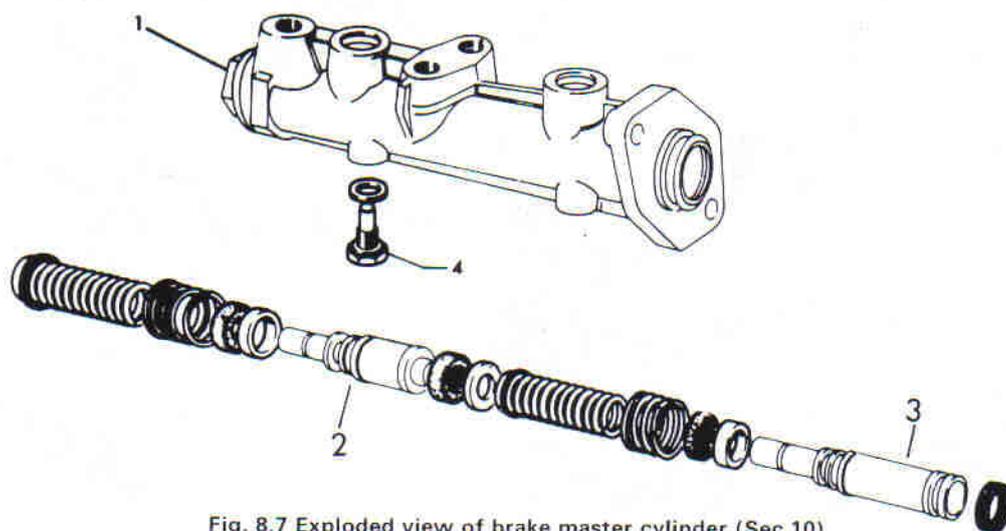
Exploded view of brake master cylinder (Sec 10)
